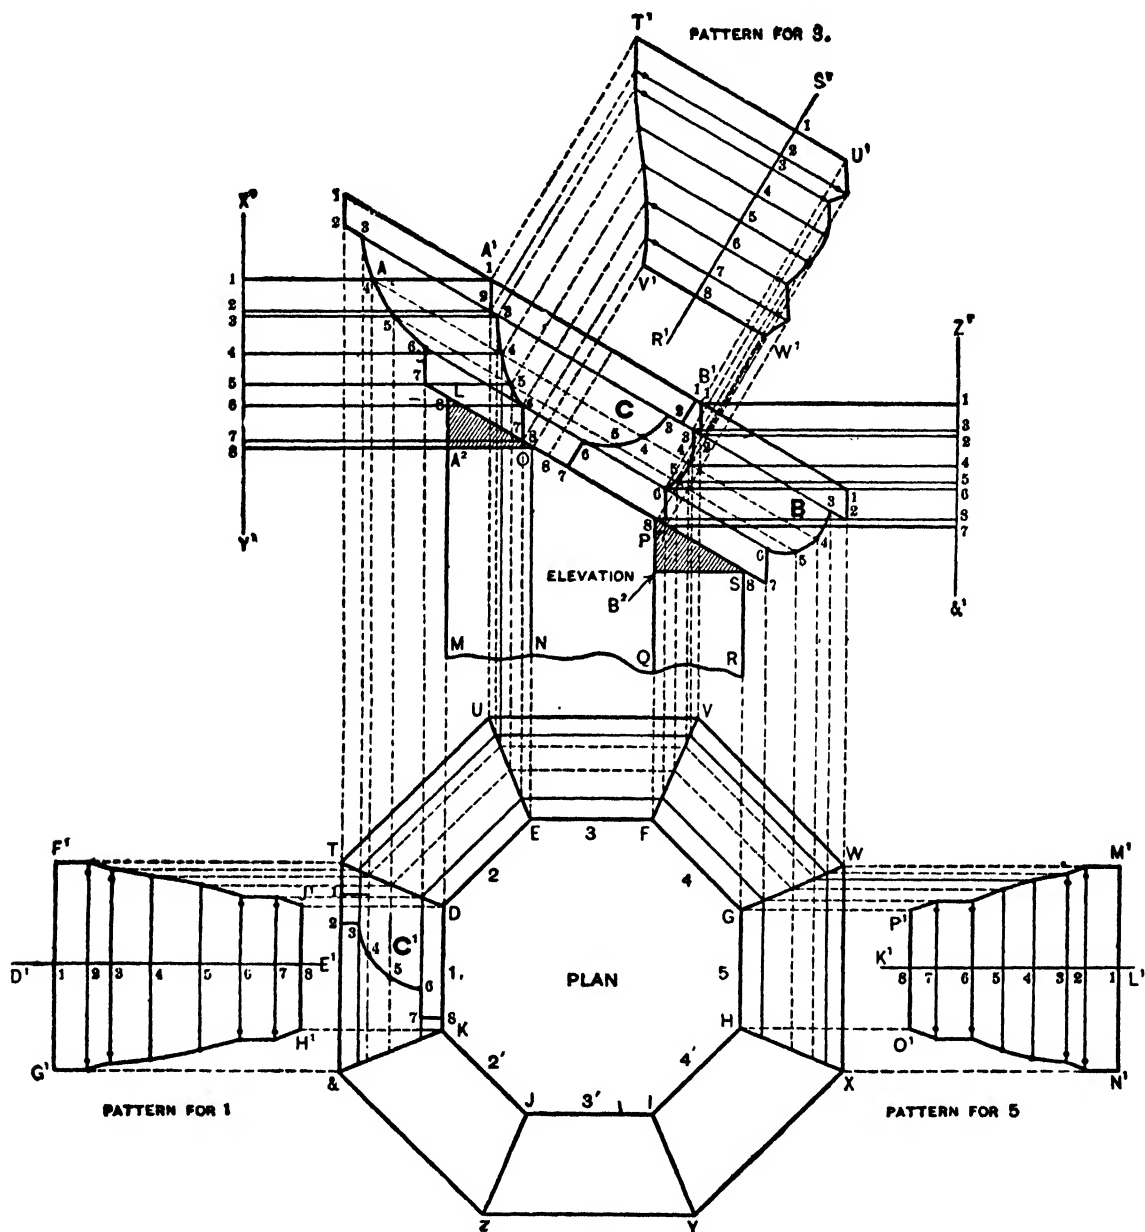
Plan, Elevation, Miter Lines and Patterns
